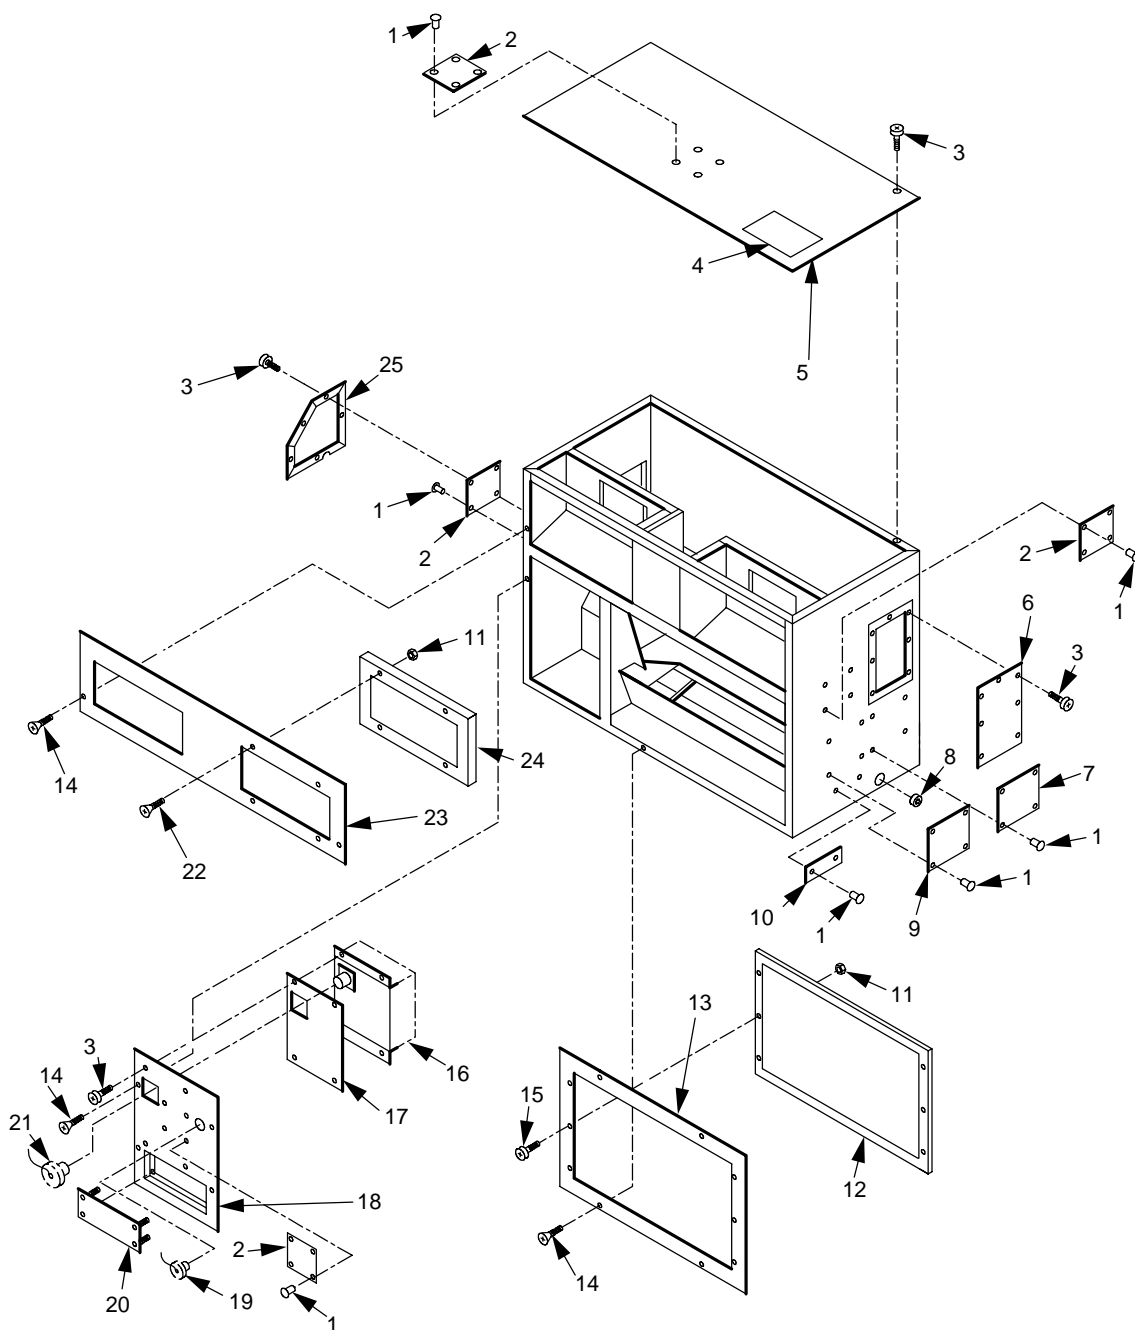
Evaporator Assembly (Sheet 1 of 4)
